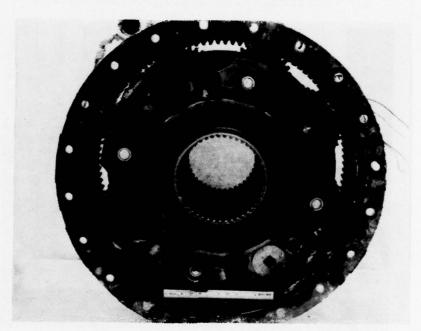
View looking into ring gear case after 25-minute loss-of-lube test of optimized transmission configuration number 1.
